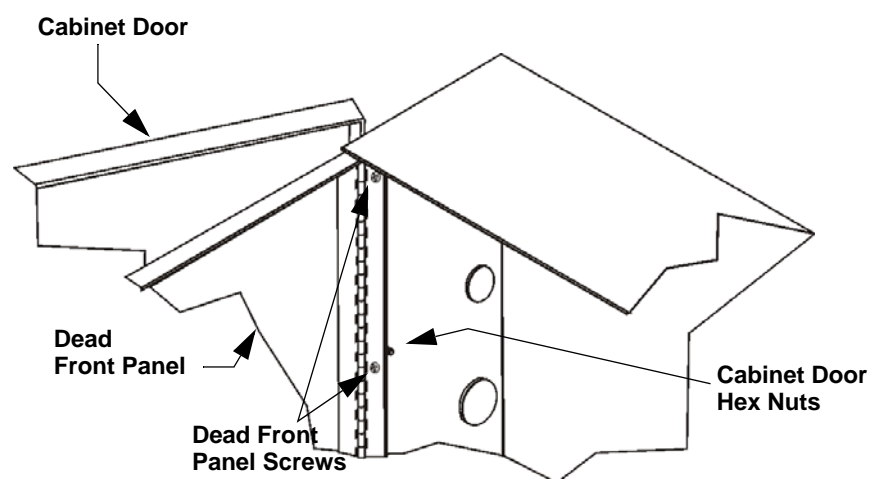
Cabinet Door and Dead Front Panel Removal
